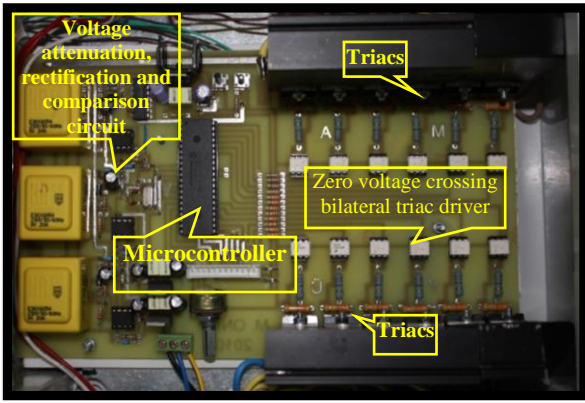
The printed circuit board of designed starter and protection relay and its layout of the elements.
